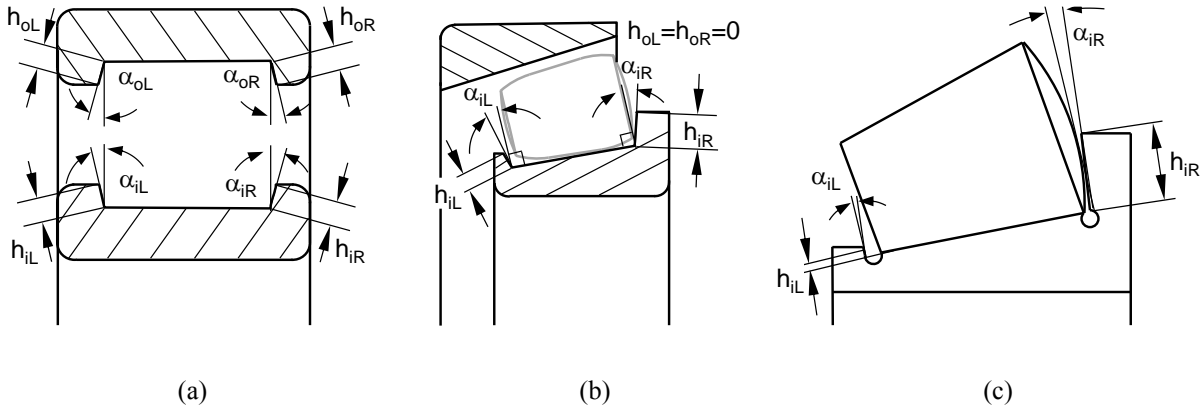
Flanges in roller bearings: (a) Angle and height definitions; (b) Tapered roller bearing; (c) Detail of the flanges in the tapered bearing.
